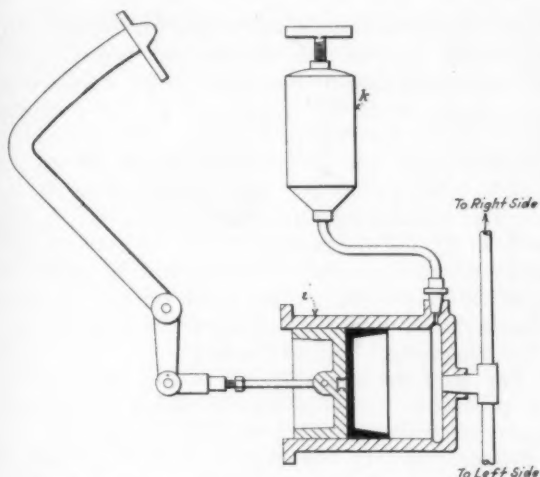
MASTER-CYLINDER OF THE HYDRAULIC TYPE OF BRAKE
